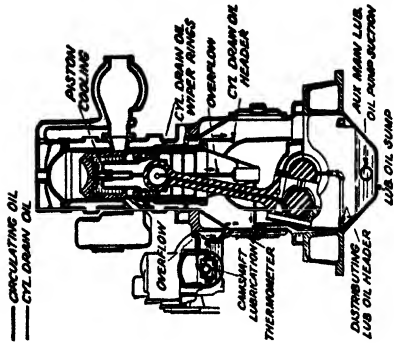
Combined pressure oiling and piston cooling system used on Fairbanks, Morse Diesel.
